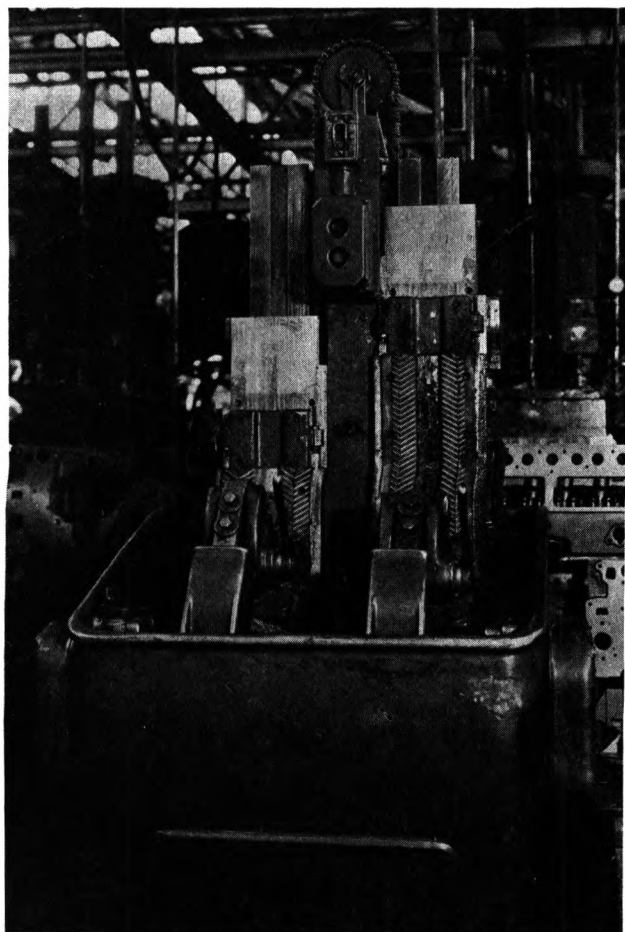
DUPLEX SURFACE-BROACHING MACHINE FOR BROACHING TO SIZE THE JOINT FACE AND ENDS OF CRANKSHAFT-BEARING CAPS
